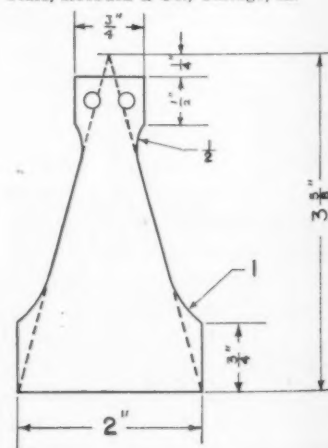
Sample Design for Krouse Cantilever-Beam Fatigue Specimen.
